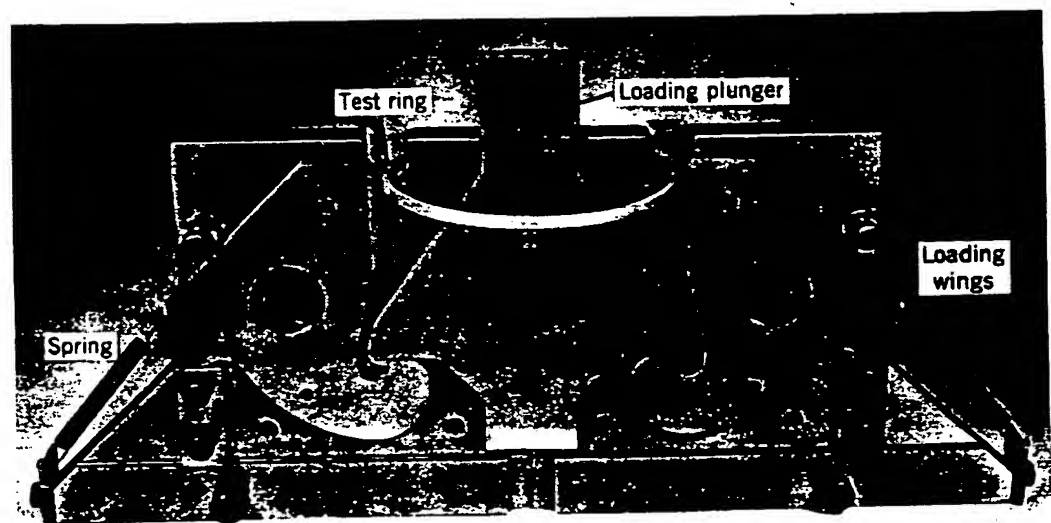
Section of compression model test fixture. (Courtesy of A. O. Smith Corp.)
